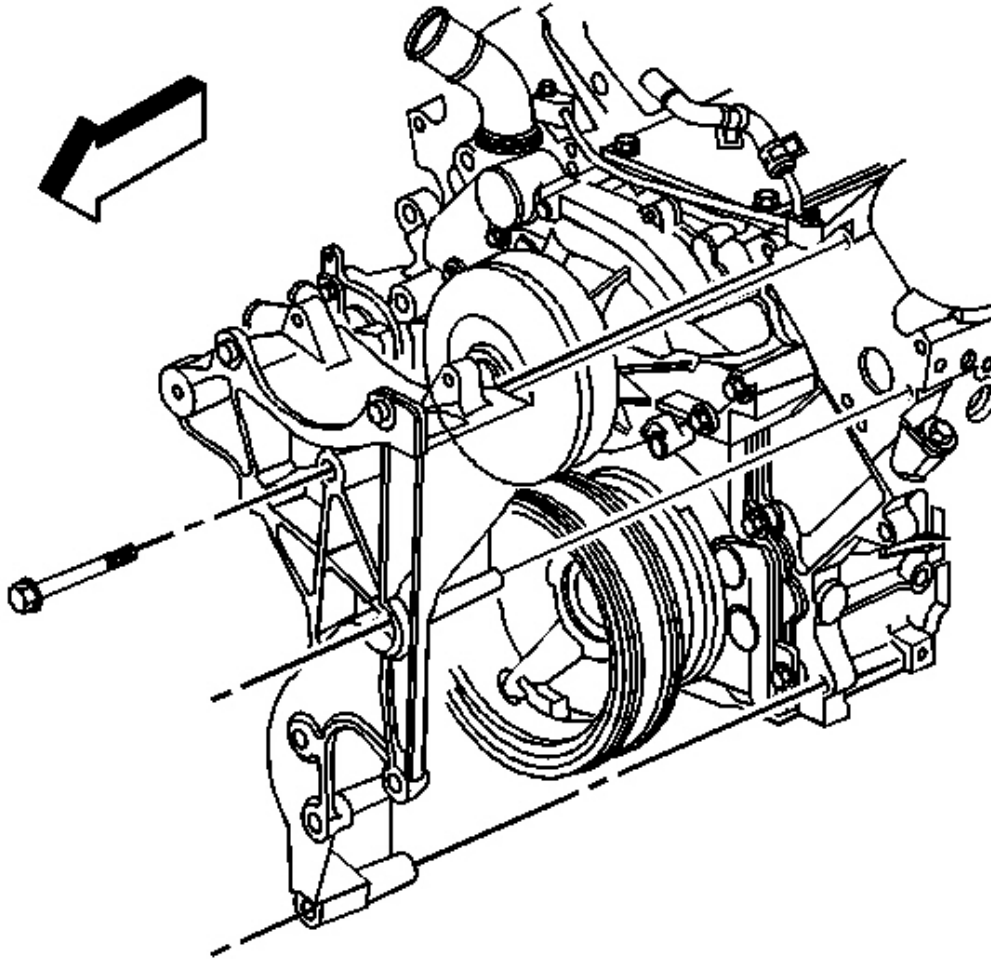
View Of Generator Bracket & Bolts (4.8L, 5.3L & 6.0L)
